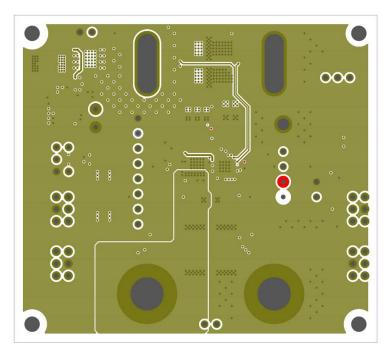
PCB - Inner Layer - Layer 4 (Top View)
